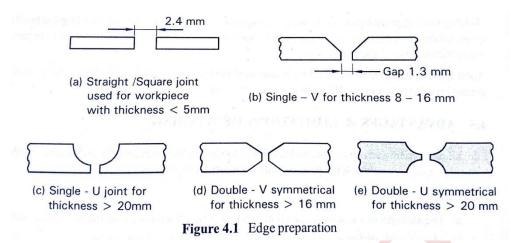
(a) shows a square or straight joint suitable for workpieces with thickness less than 5 mm. Some workpieces are beveled only on one side, as in single-V or single-U joints, but for very thick plates, beveling is required on both sides as shown in figure 4.1 (d) and (e).
